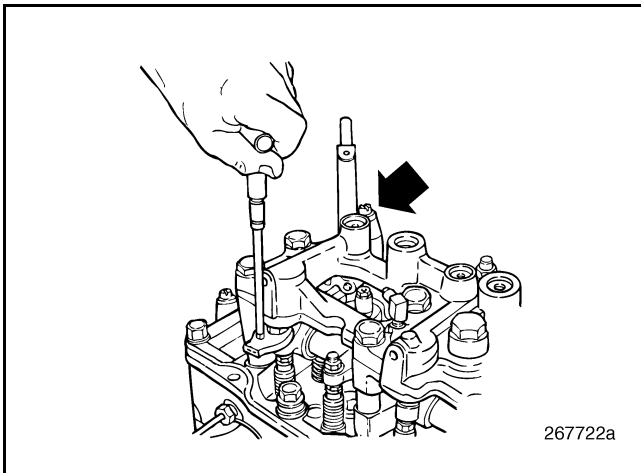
Adjusting Valve Lash on Engines Equipped with a J-Tech™ Engine Brake
